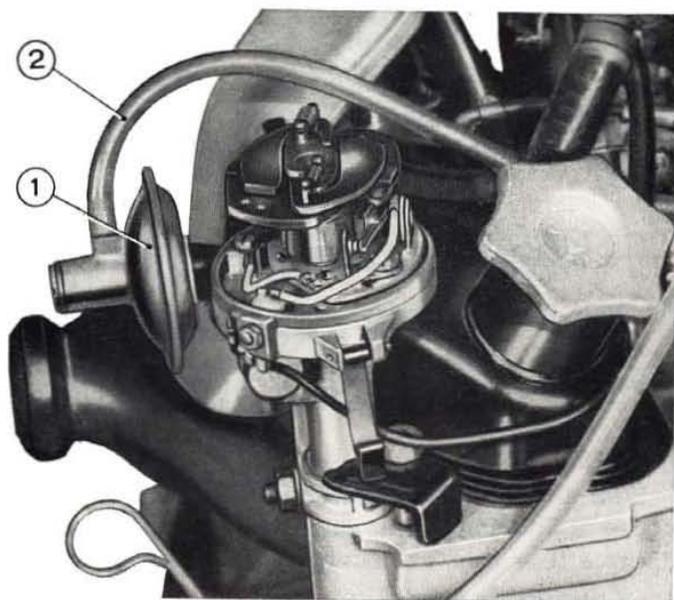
Ignition distributor in place on engine, with cover removed.
